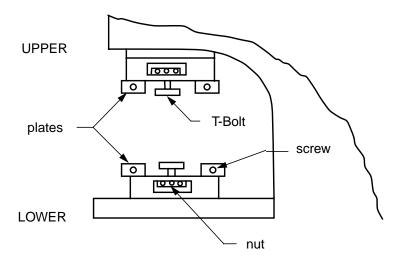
Schleuniger CT32: Set-Up for Installation of Die Holders
